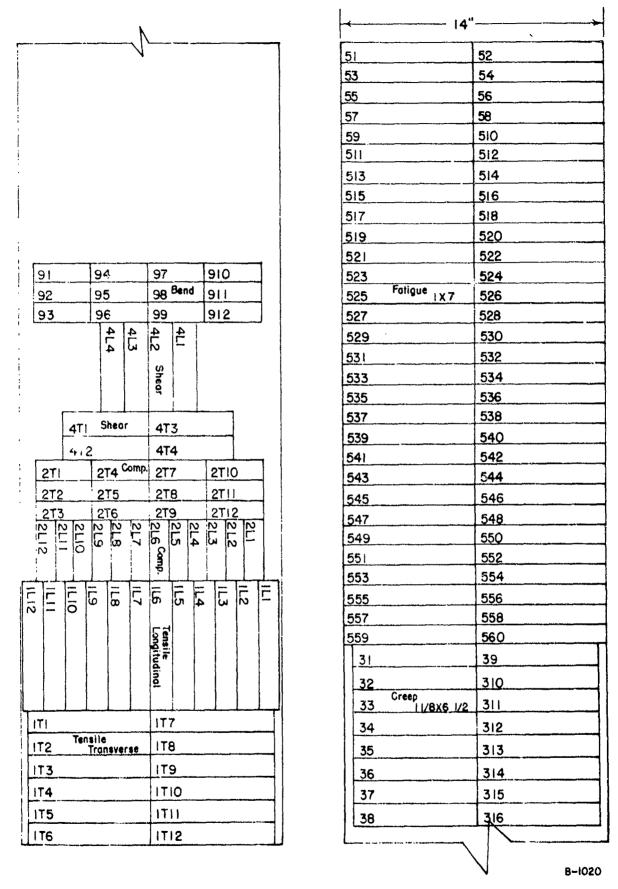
SPECIMEN LAYOUT FOR AF2-IDA SHEET
